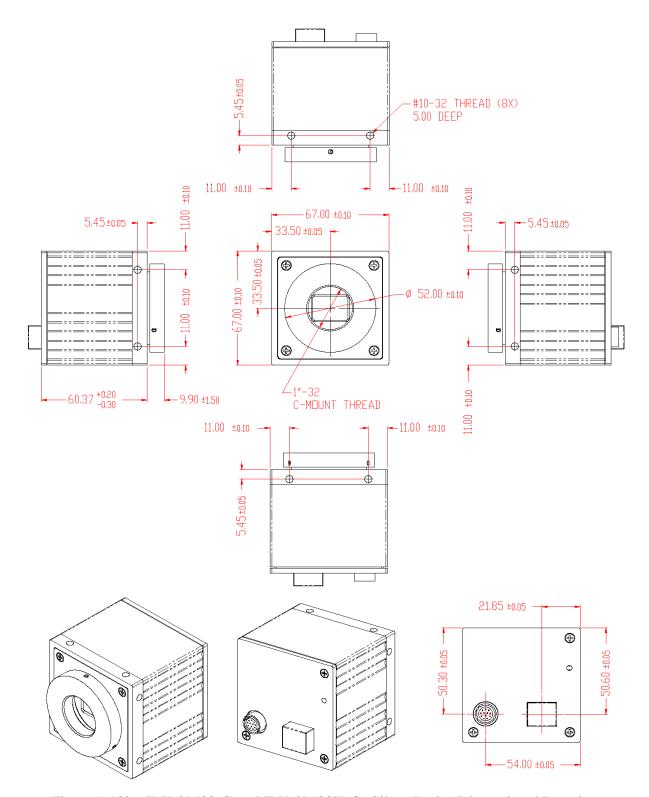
IPX-2M30-G and IPX-2M30H-G (Silver Body) Dimensional Drawings
